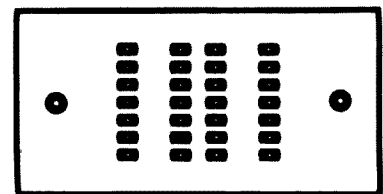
Etched board for mounting the two MAN 74 readouts on the front panel.
